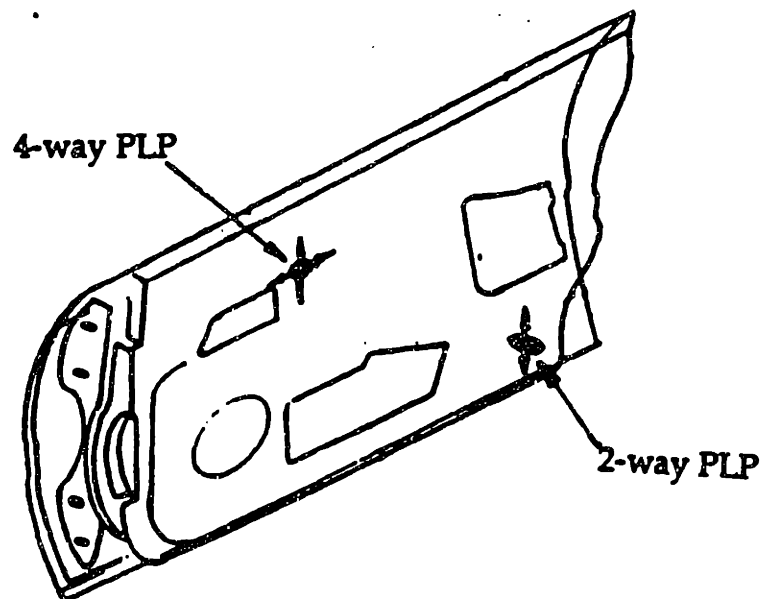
Principal Locating Point (PLP) positions on a door assembly.
